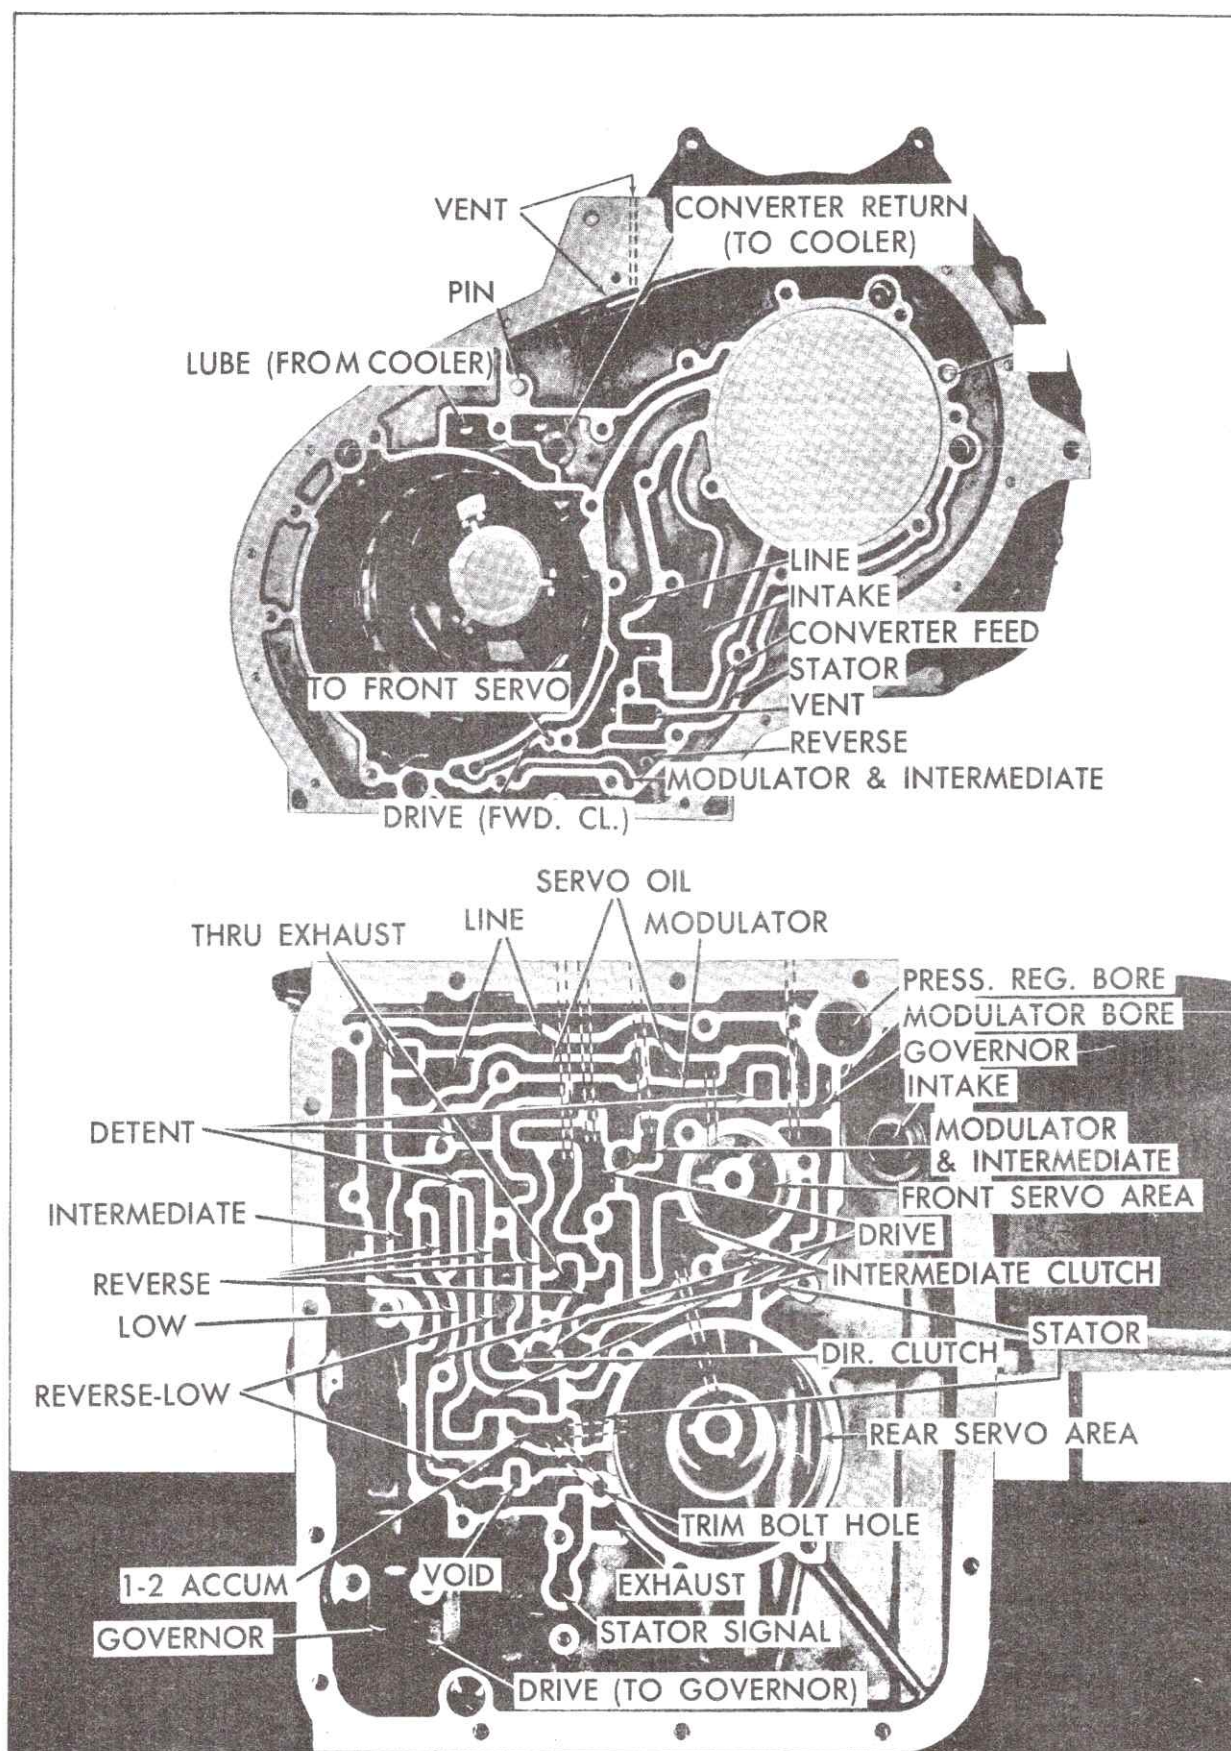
Case Oil Passages - Front View and Bottom View
